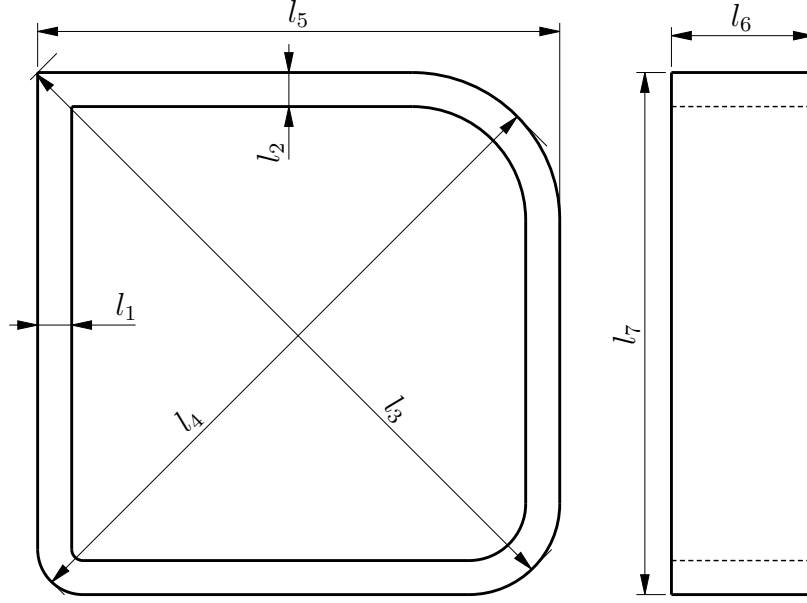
Dimensions of the CAD part shown in Fig. 4-15
